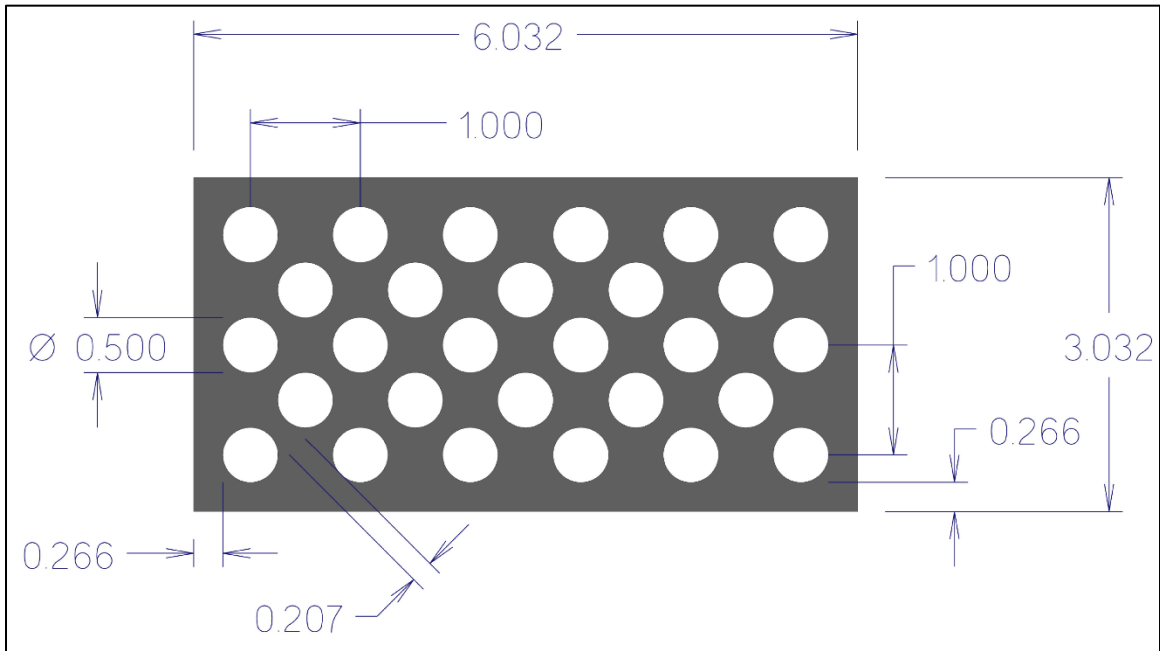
Specimen block dimensions and threaded hole pattern.
